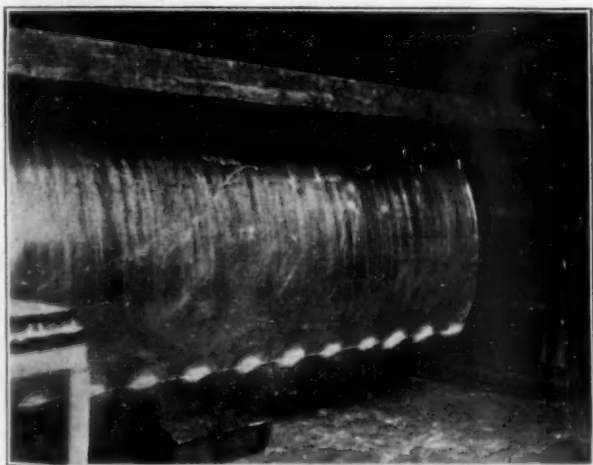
Aluminum Sheet Notched and Tack-Welded.
